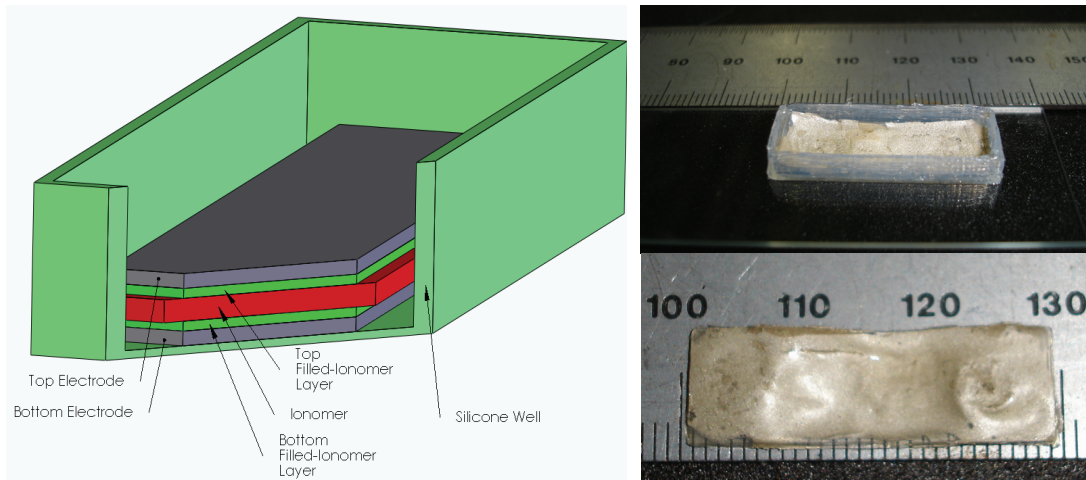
Freeform fabricated IMPC. Shown is a cutaway CAD model (left), IMPC in its silicone well (top right), and after hydration and removal (bottom right)[20]
